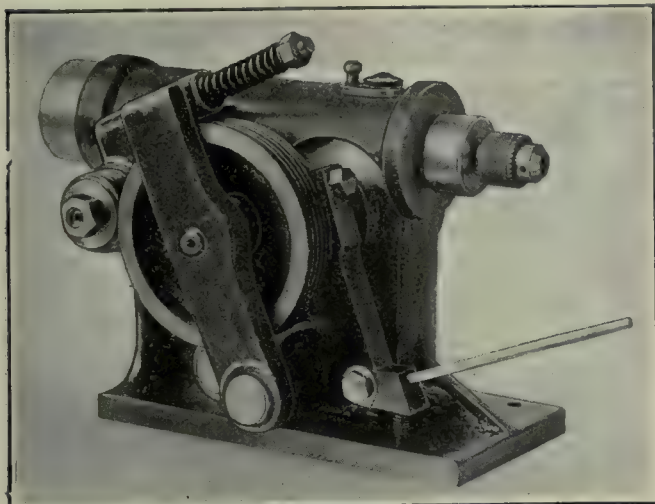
KINGSBURY NO. 8 AUTOMATIC DRILLING HEAD
